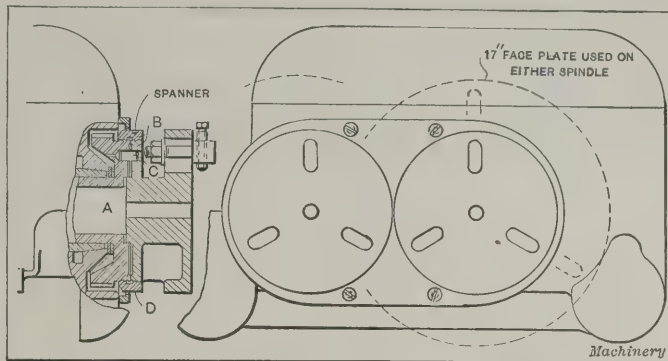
Method of Supporting Chucks on Double-spindle Machine
